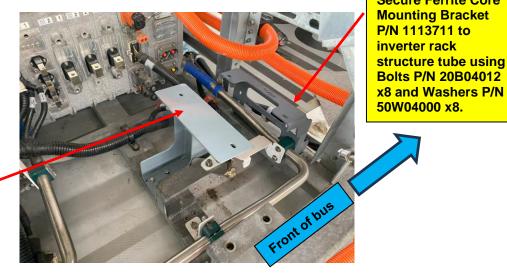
Install Ferrite Core Mounting Brackets in Forward Inverter Rack
